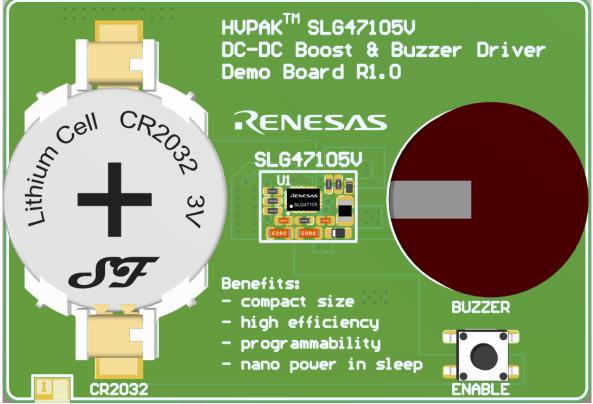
Boost & Buzzer Driver Demo PCB Design (Top Side)
